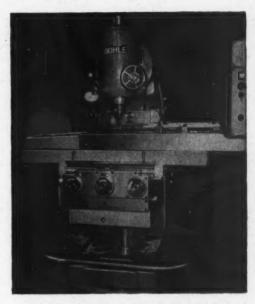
Bohle type FS 120/1850 vertical milling machine adapted for 3-axis control by the AEG punched-tape system
